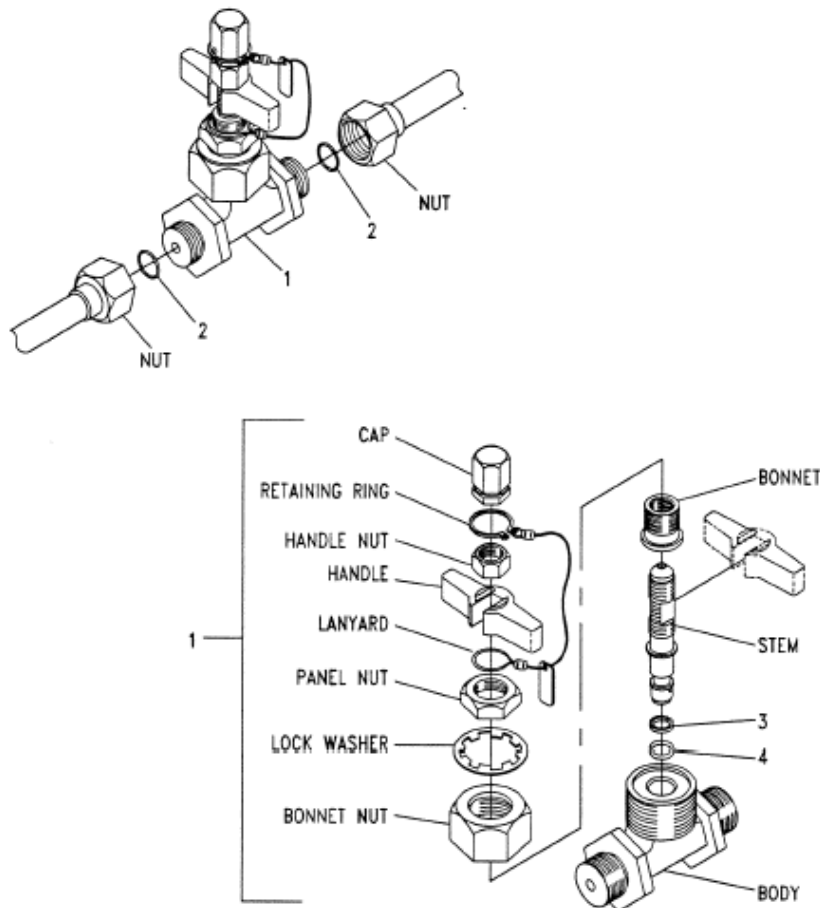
Gauge Isolation Needle Valve (PLC-10699)
